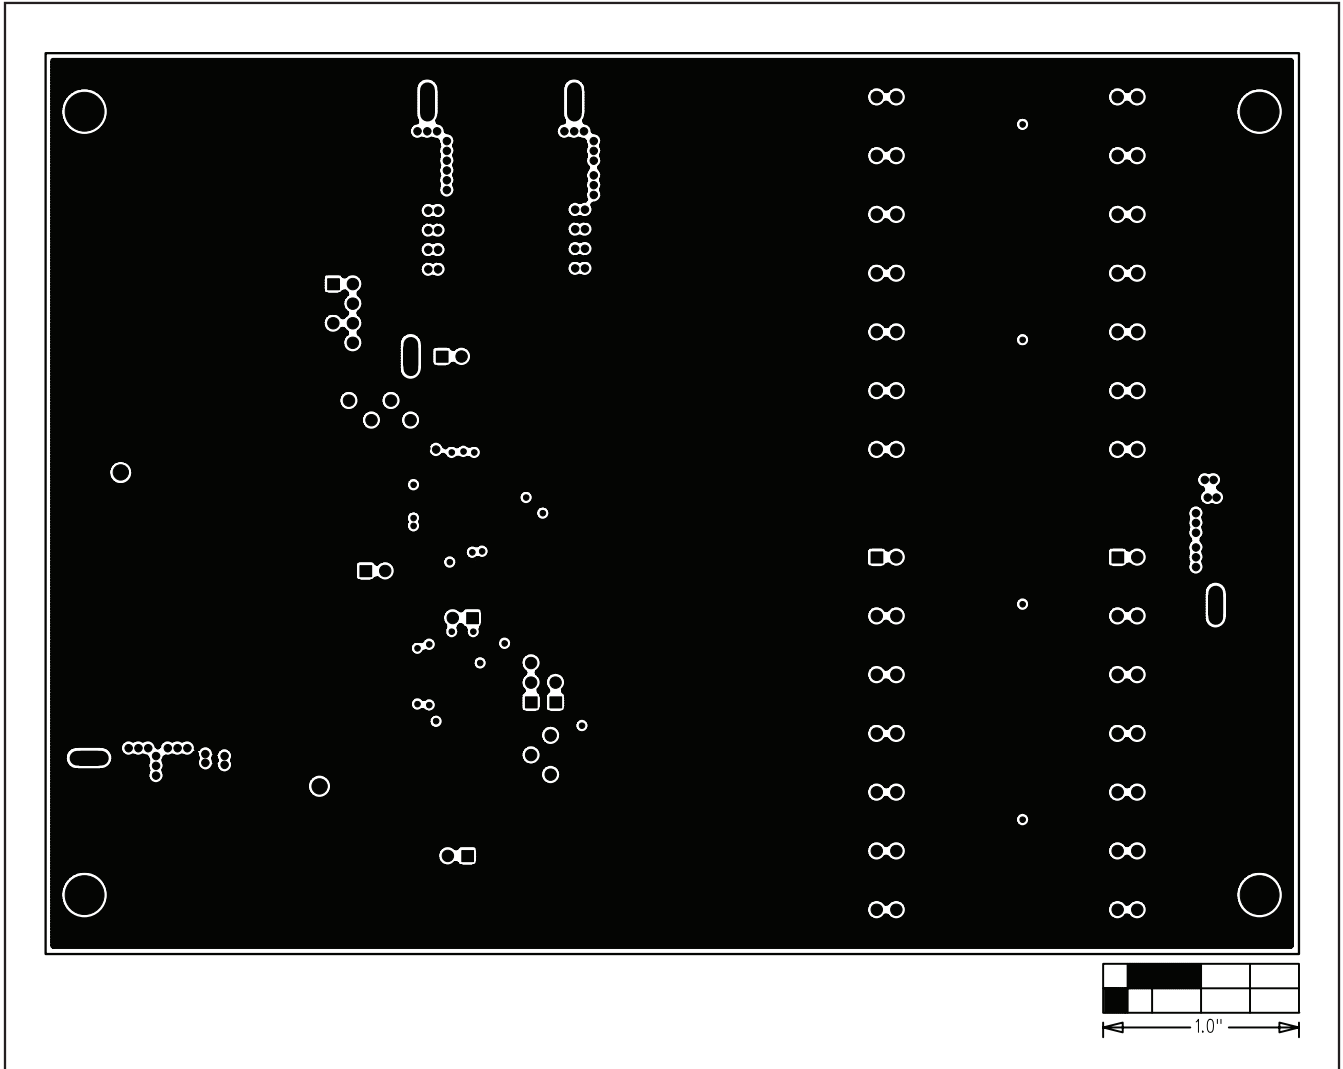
MAX1215N EV Kit PCB Layout—Ground Plane (Layer 2)
